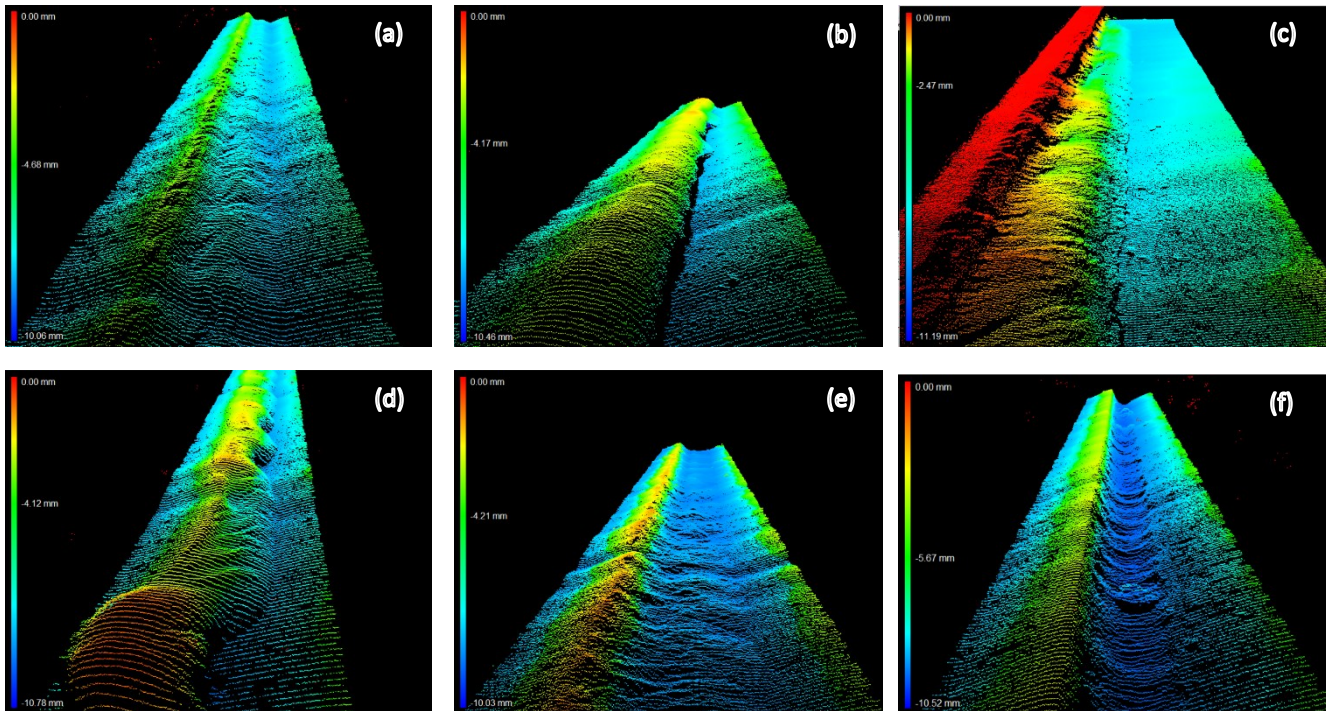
3D OCT images of the welds produced by tactile laser welding under different processing conditions, featuring (a) a good quality weld and common faults: (b) no bonding to the bottom sheet; (c) no bonding to the top sheet; (d) an ununiformed weld bead; (e) a wide weld bead; and (f) under-cambering.
